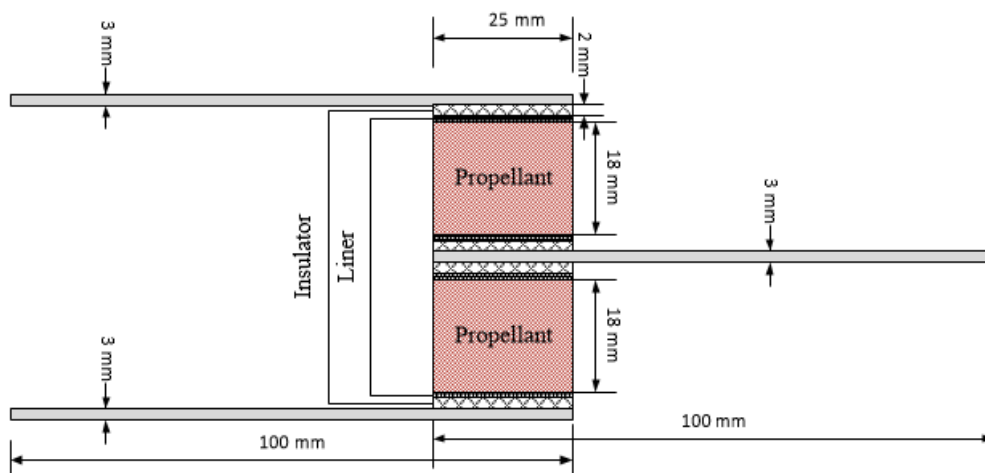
2D Sketch of MILP Shear Test Specimen
